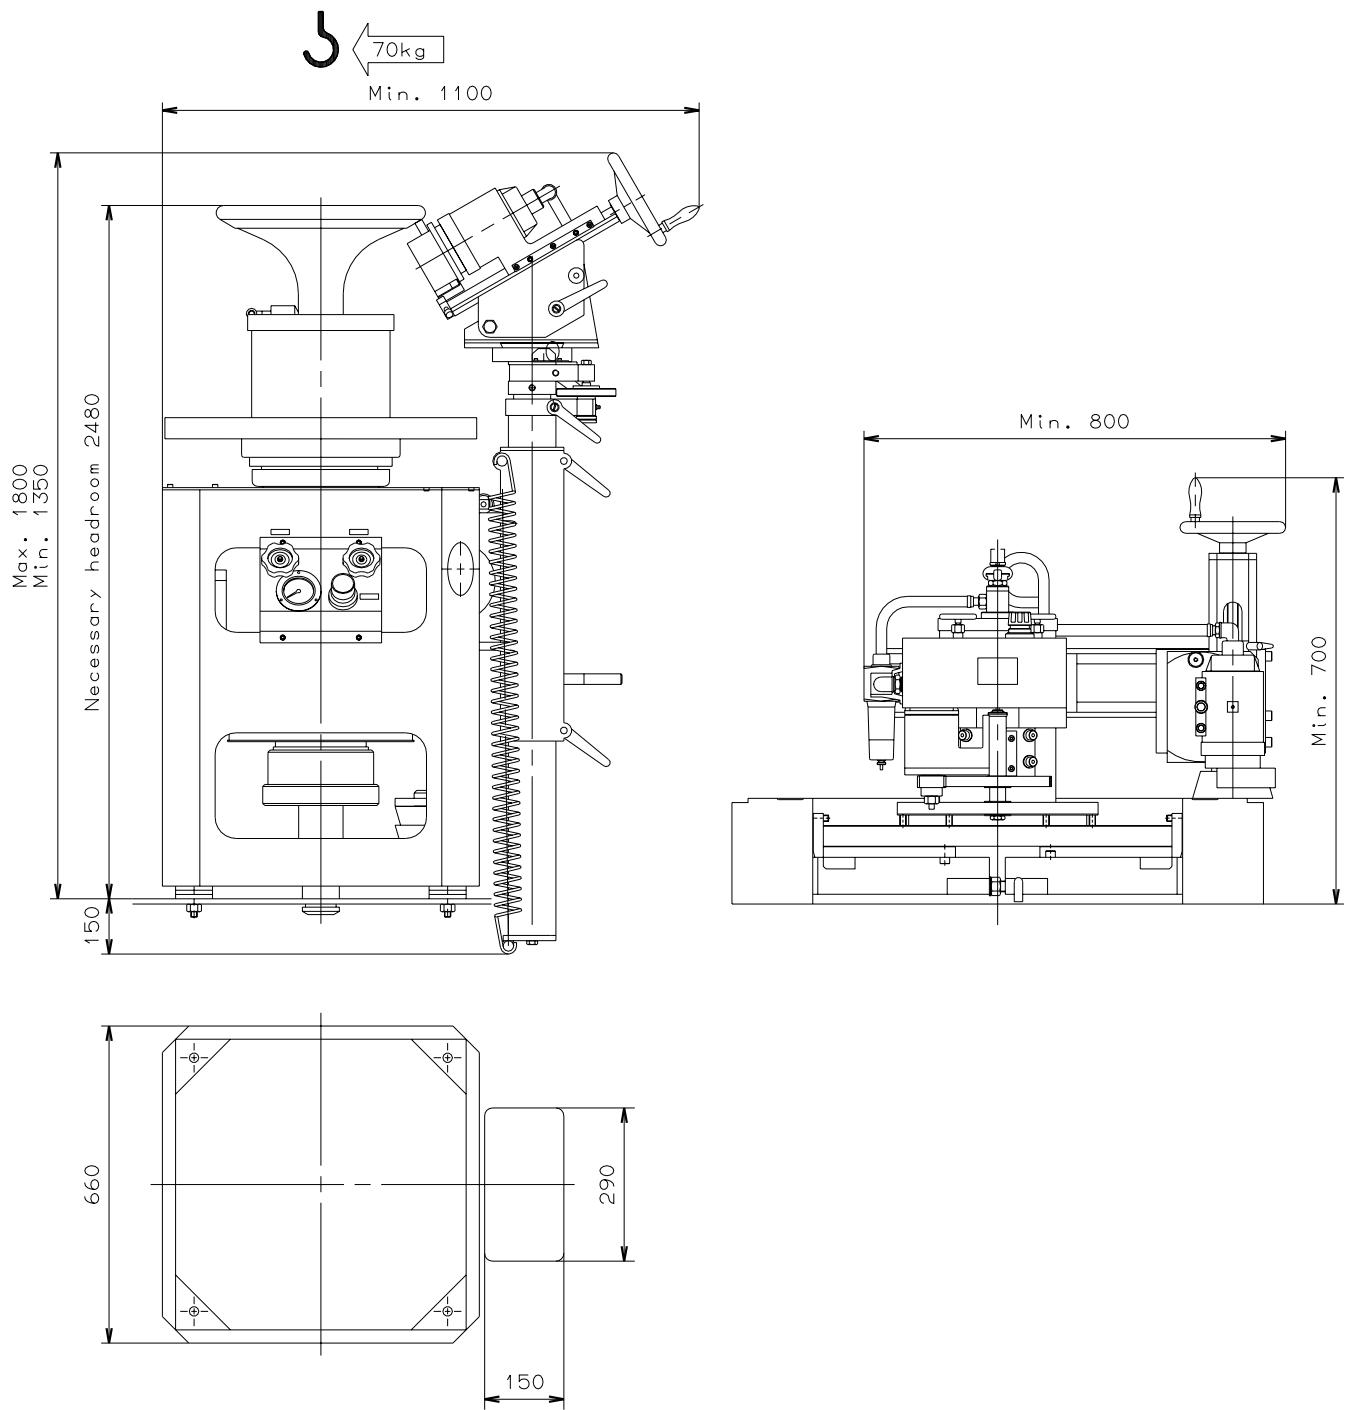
Dimensions and masses of tools (for guidance only)
